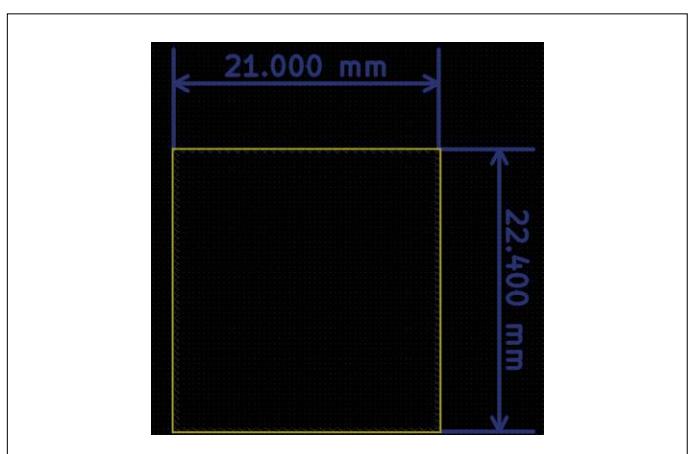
Edges, dimensions, and copper area in Pcbnew.
